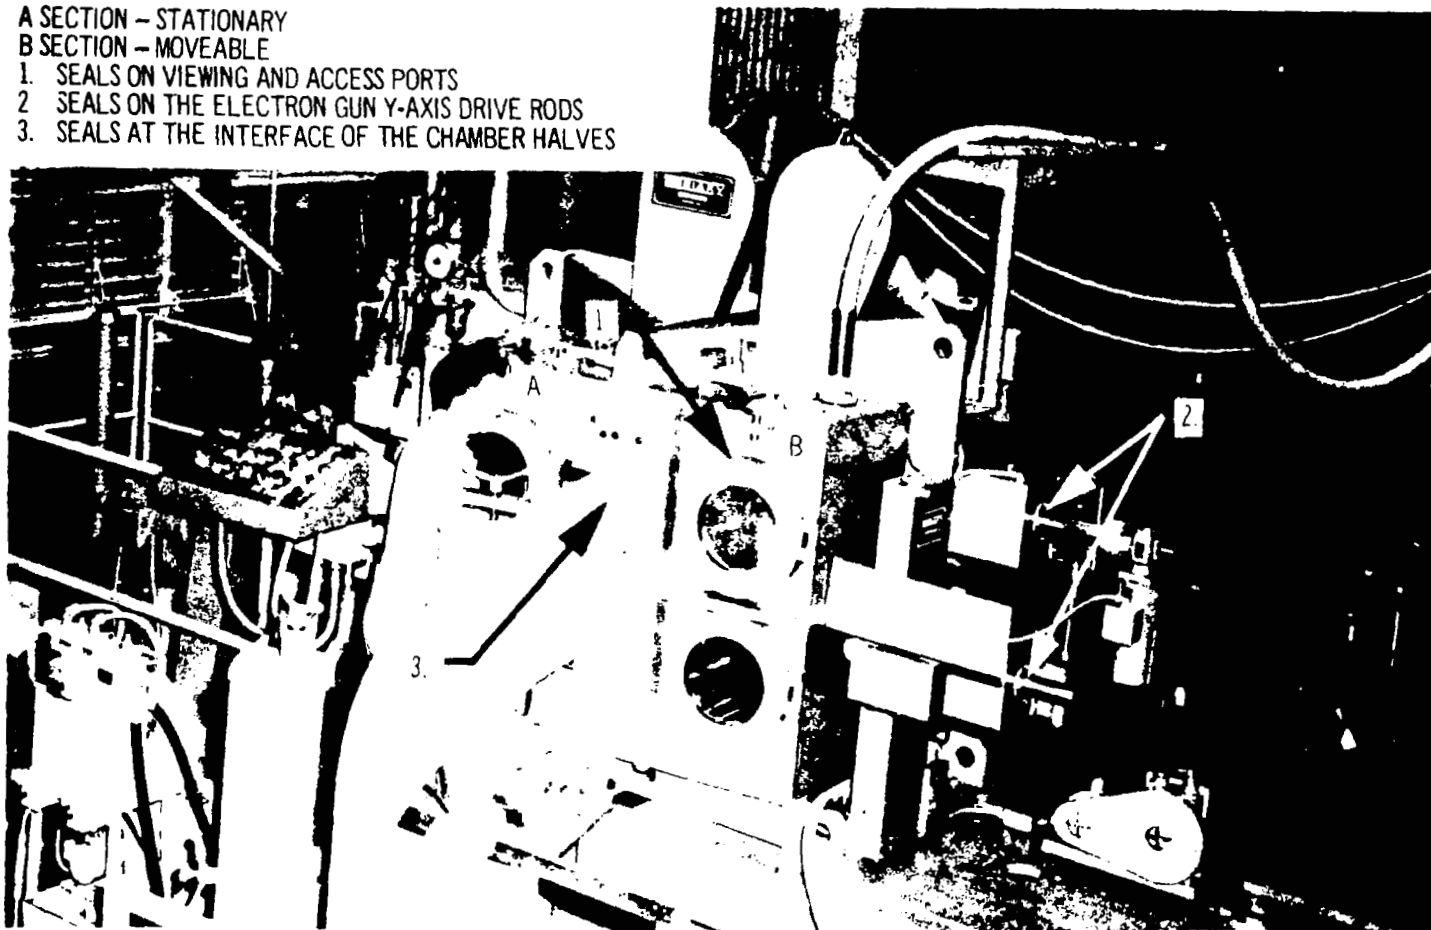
Vacuum seals on the split chamber Y-ring welding unit.
